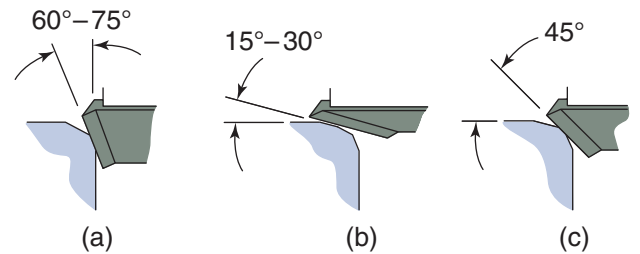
Typically, three cuts are made to a valve seat: (a) 60° – 75° for below the seat, (b) 15° – 30° for above the seat, and (c) 45° for the valve seat itself. The angle of the valve seat cut is predetermined by the engine manufacturer.
